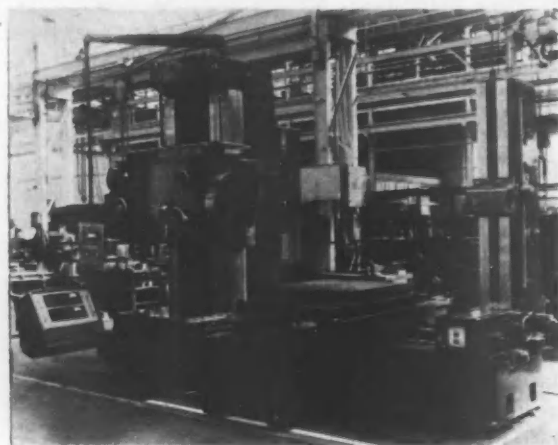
Numerically controlled horizontal boring machine (Richards)
